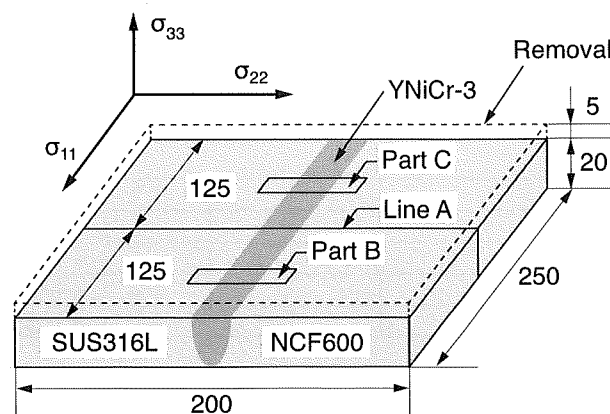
Specimen of SUS316L-NCF600 welding joint.
